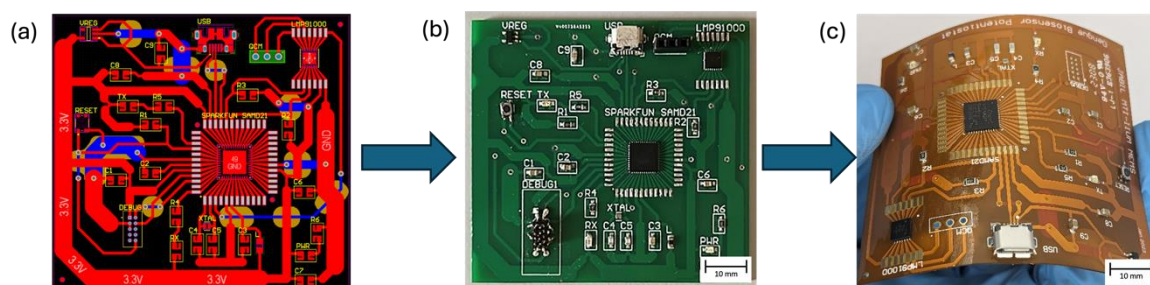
(a) Printed Circuit Board layout design of the potentiostat system in Altium Designer. Fabricated potentiostat on a rigid PCB (b) and flexible PCB (c).
